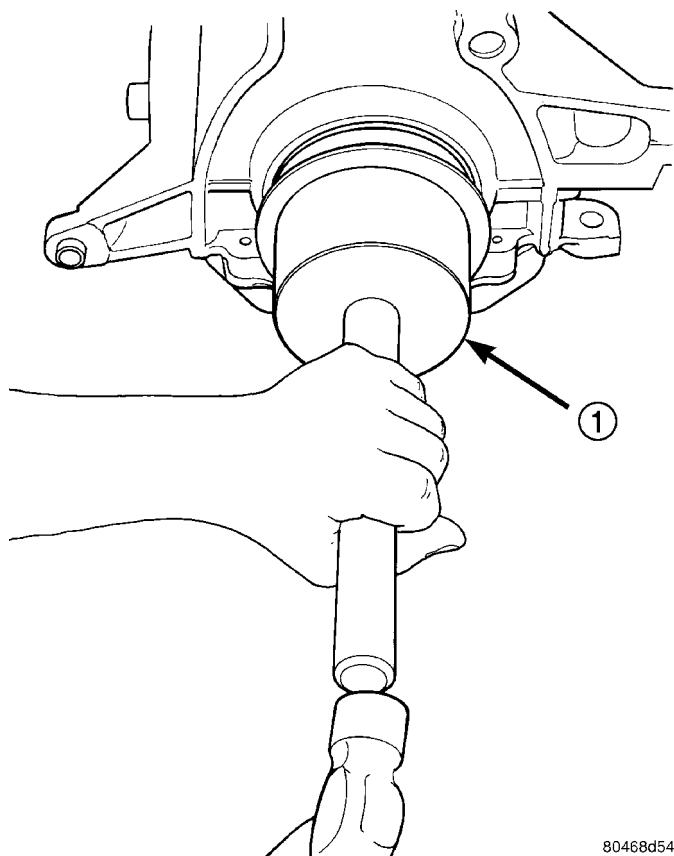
Crankshaft Seal and Special Tools 6926-2 & C-4171
